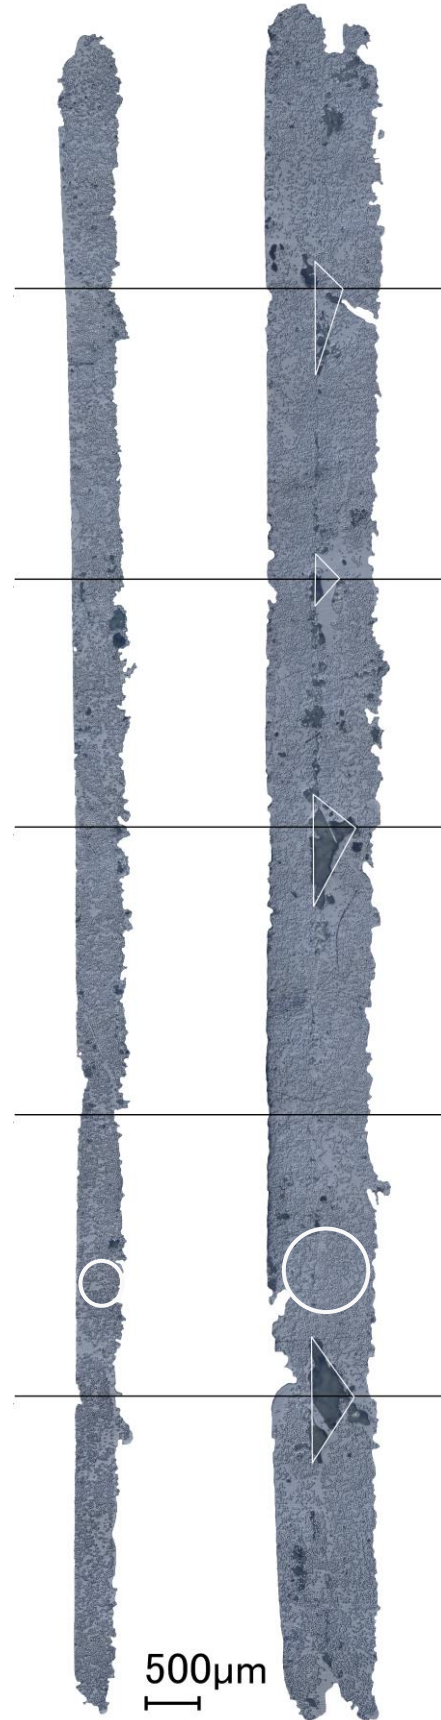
a) single layer cross section, weld zones shown as black lines (left), b) dual layer cross section (right), triangular voids marked in white. Both samples were produced with the left side of the cross section on the print bed.
